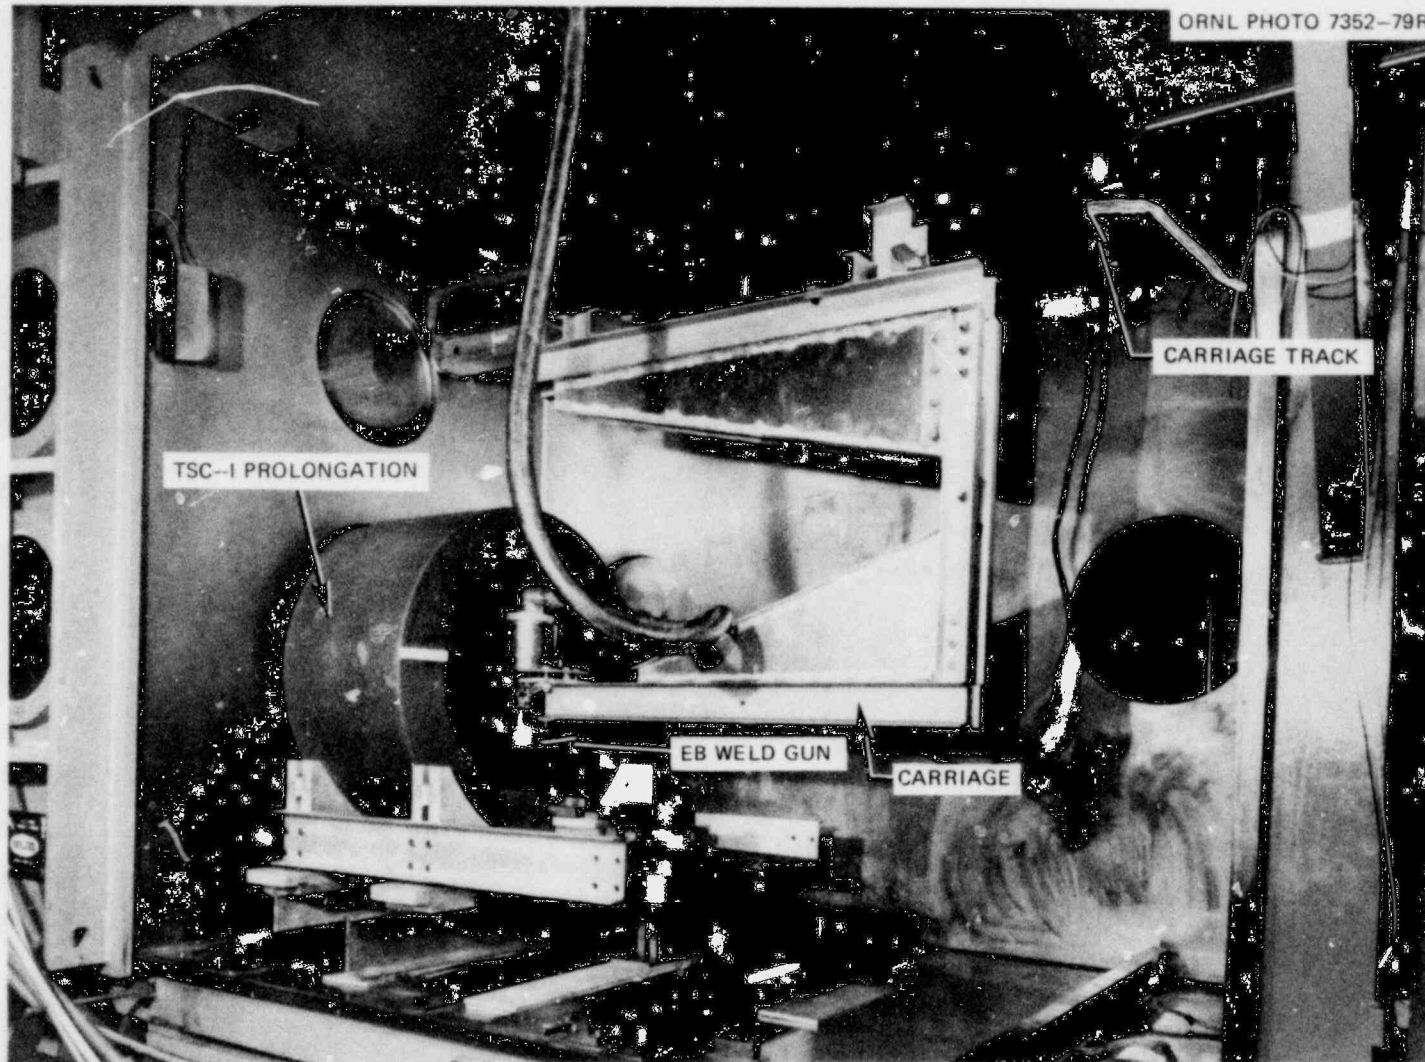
View of interior of EB-weld box prior to making EB weld in TSC-1 prolongation.
